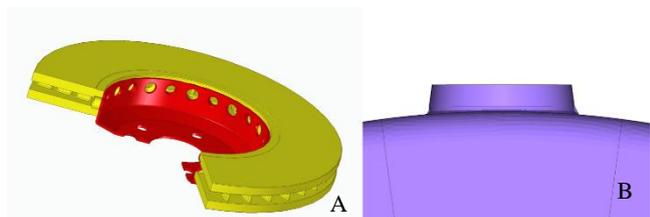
Geometry of a plug-in brake disc for a passenger car: A section view on the assembly; B detailed view on a single locking pin at the hub
